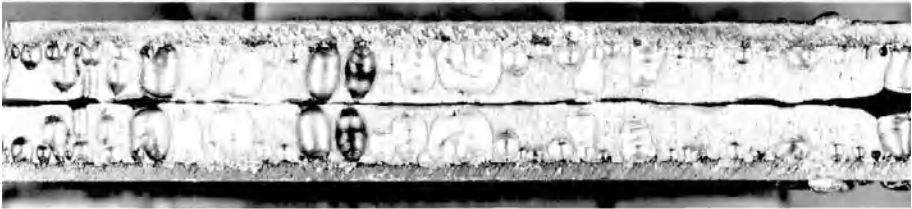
Texture test after the first pass of a submerged arc butt welded joint of as-cut sheets cut by the plasma air process
